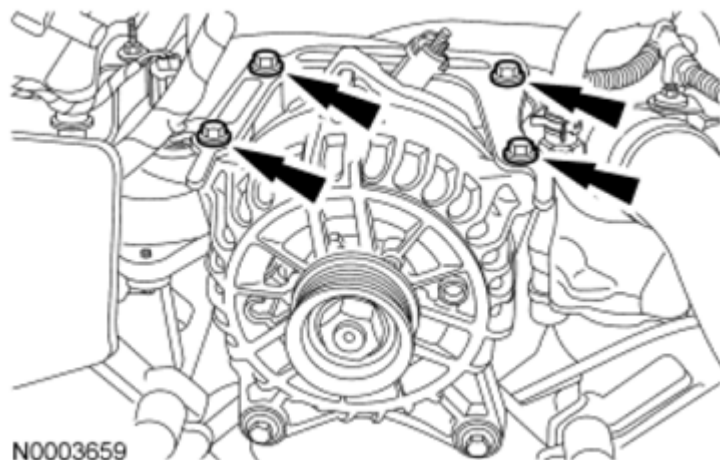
Locating Generator Mounting Bracket And Mounting Bolts
